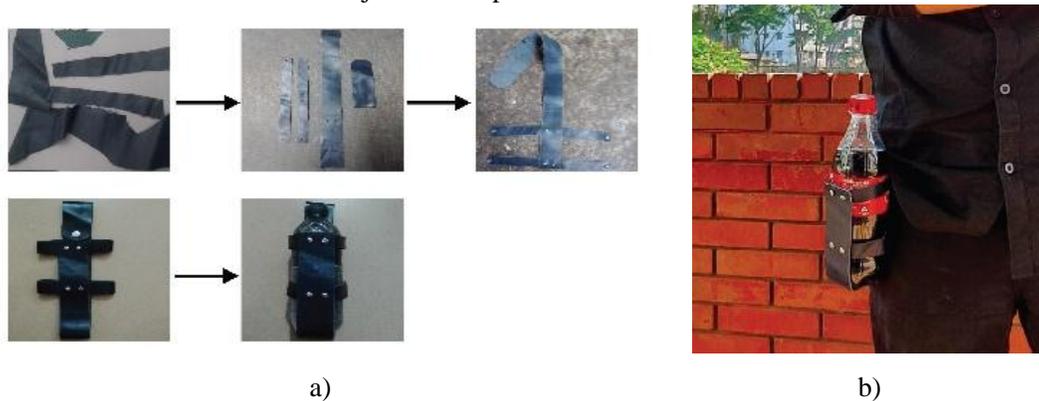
Bottle Holder (a) manufacturing process (b) final view.
